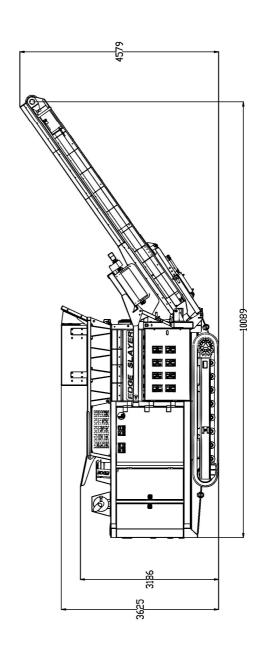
Slayer Track Raised / Working Technical Dimensions
